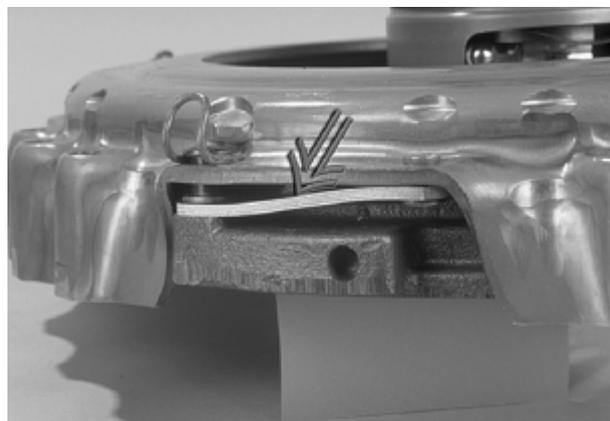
Drive Plates between Pressure Plate Housing and Pressure Plate
